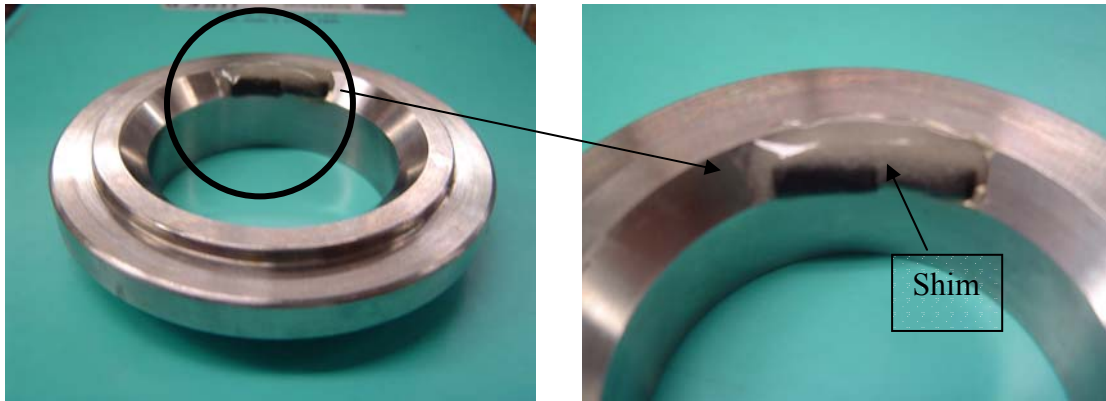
Detail Showing Placement of a Shim on the Valve Ring
